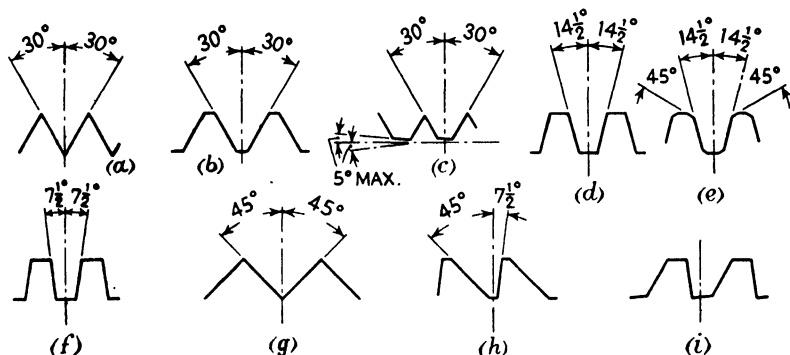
THREAD FORMS OBTAINABLE WITH UNIVERSAL TRUING DEVICE ON A "J. & L." MACHINE
